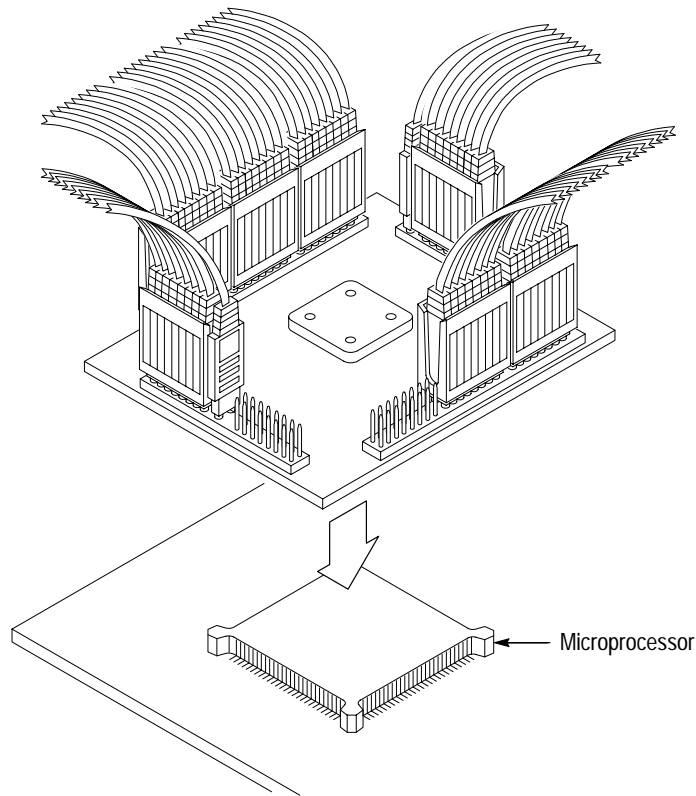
Placing a PQFP probe adapter onto the SUT
